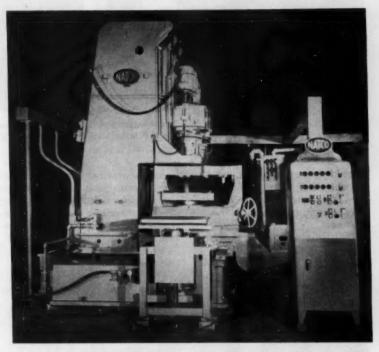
Tape-controlled machine for processing flywheel housings built by National Automatic Tool Co., Inc.
